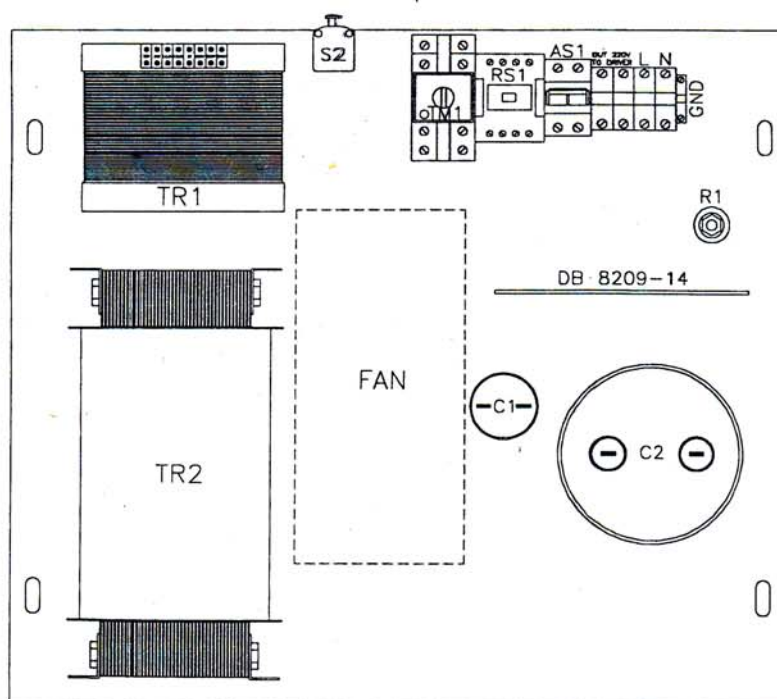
H.V. RECTIFIER board component layout (AL 2000 DB 8209-14)
